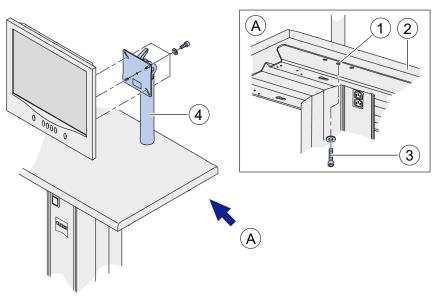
Mounting the supporting rod of the monitor holder on the instrument table
